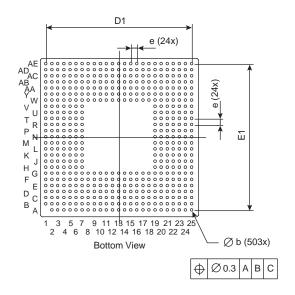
Mechanical Dimensions and Bottom Surface Nomenclature of the 503-ball HiTCE Package
